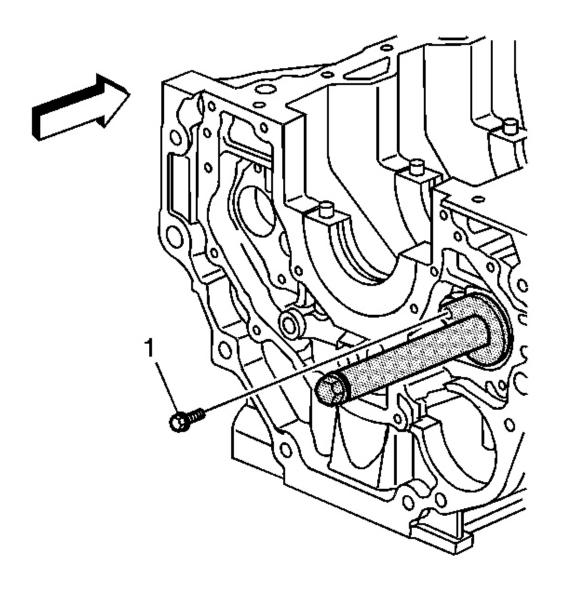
Removing Left Balance Shaft Mounting Bolt Courtesy of GENERAL MOTORS CORP.
